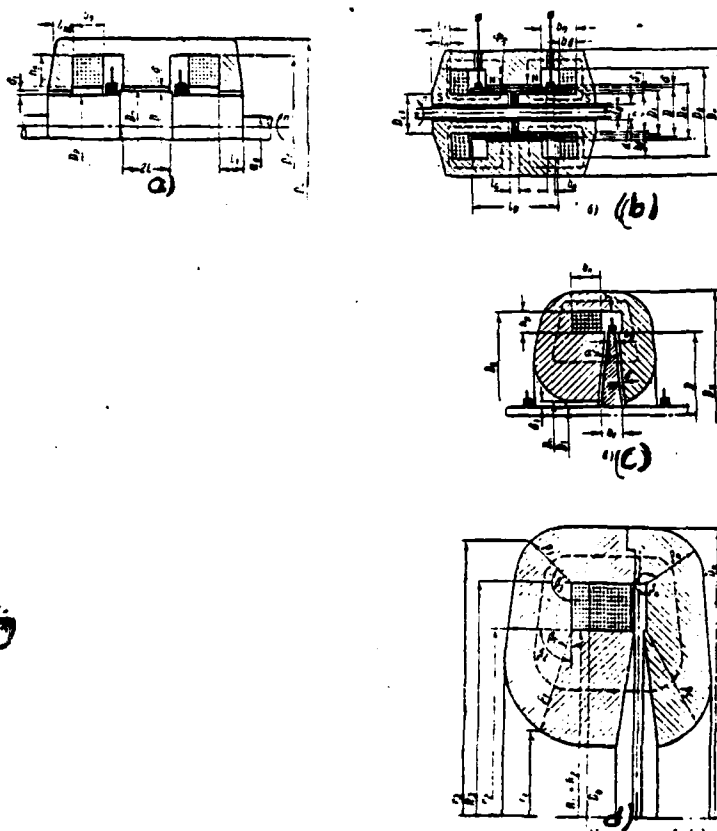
Designation of calculated sizes/dimensions of UG. a) cylindrical with the solid rotor; b) the same with the hollow rotor; c, d) disk with the conical rotor.
